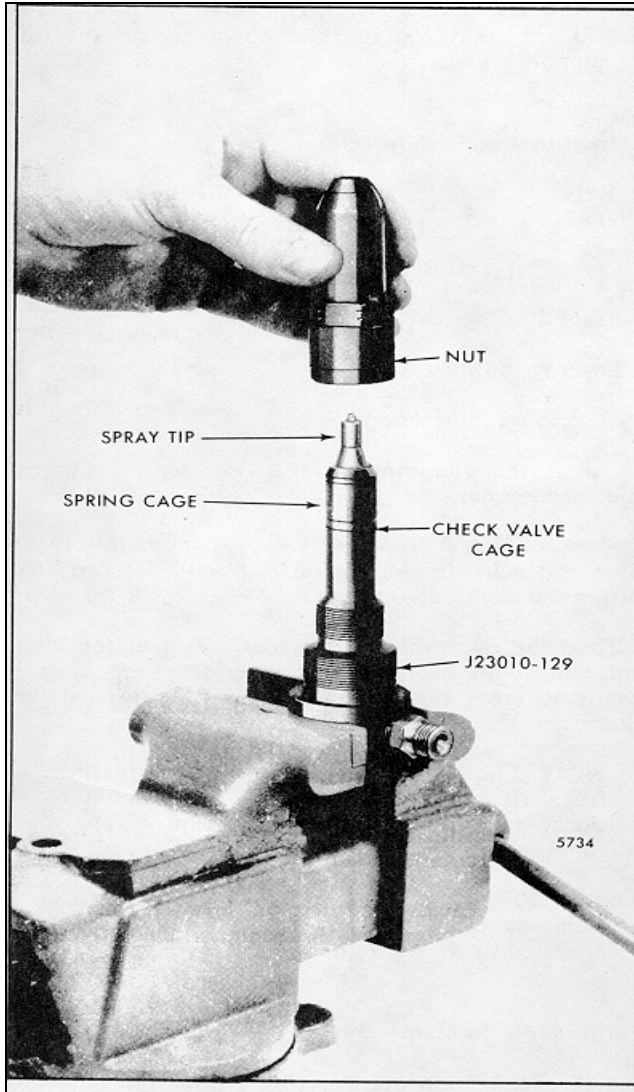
Assembling Injector Valve Parts on Tip Tester Adapter J 23010-129
